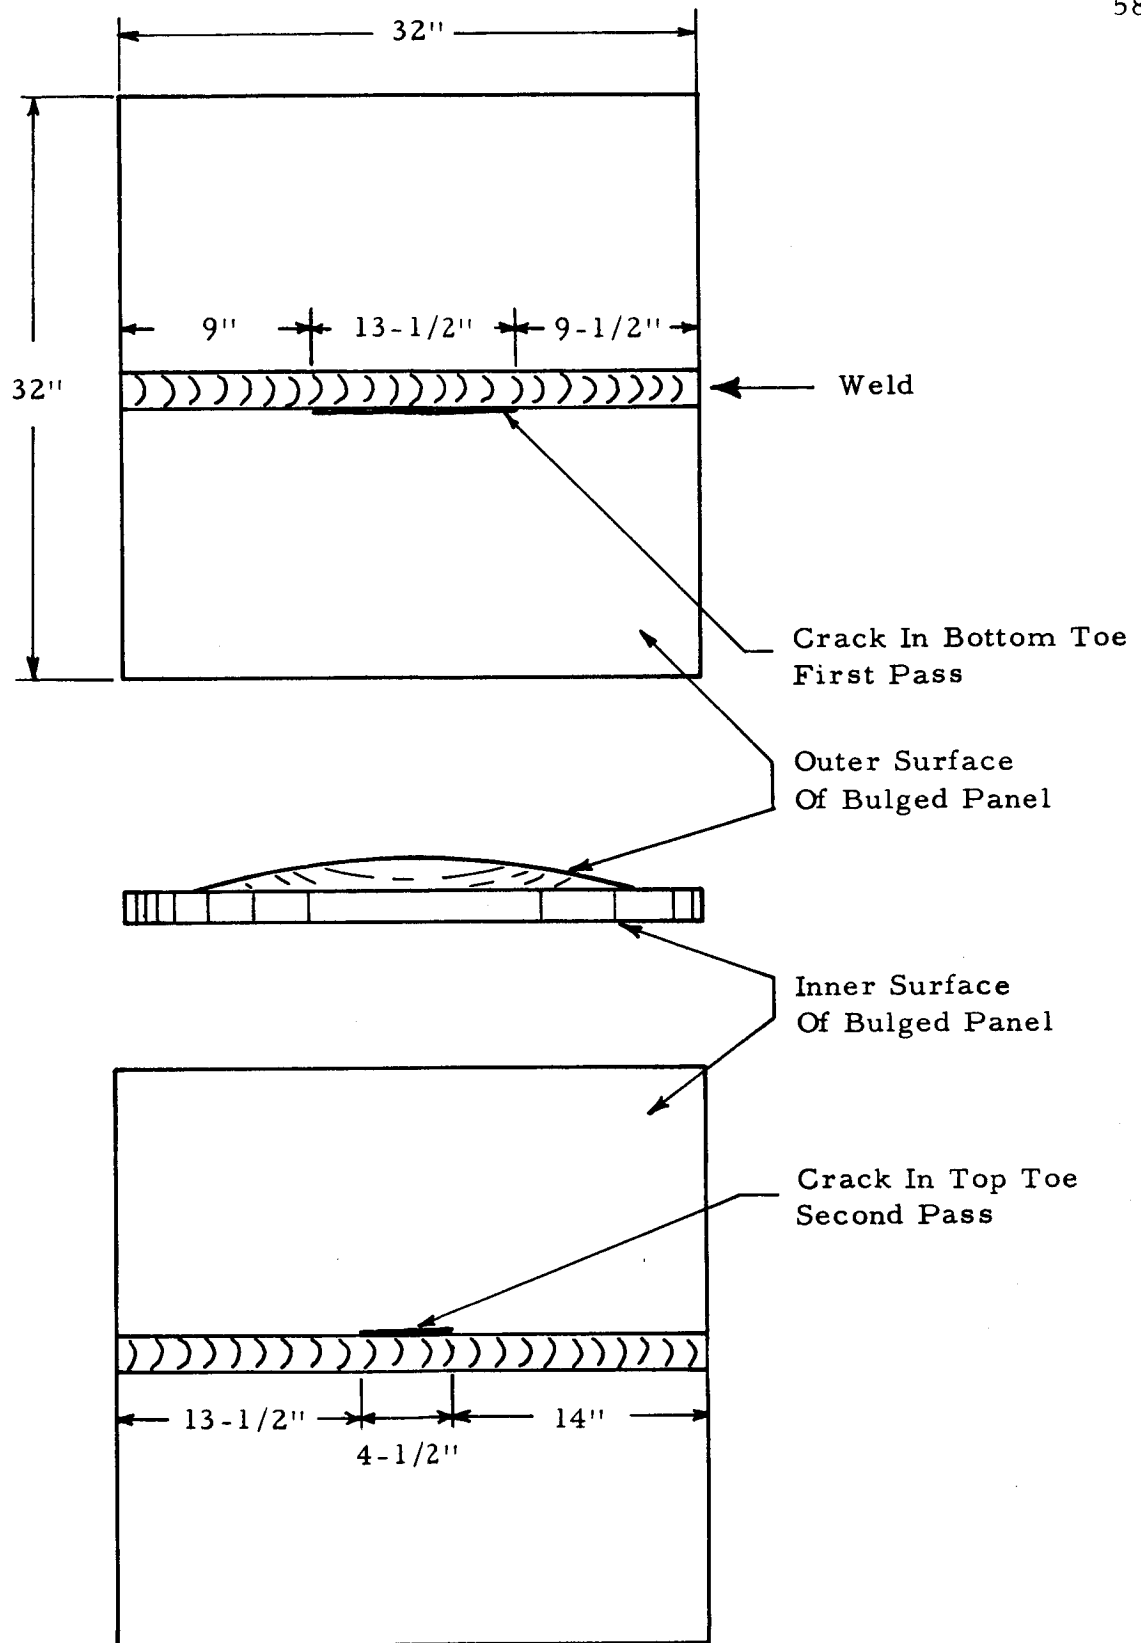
LOCATION AND MEASUREMENTS OF SURFACE CRACKS IN PANEL A
